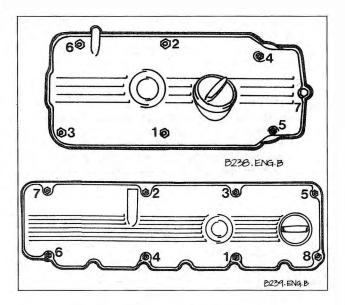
Cylinder head cover mounting nut tightening sequence on 4-cylinder engines (top) and 6-cylinder engines (bottom).
